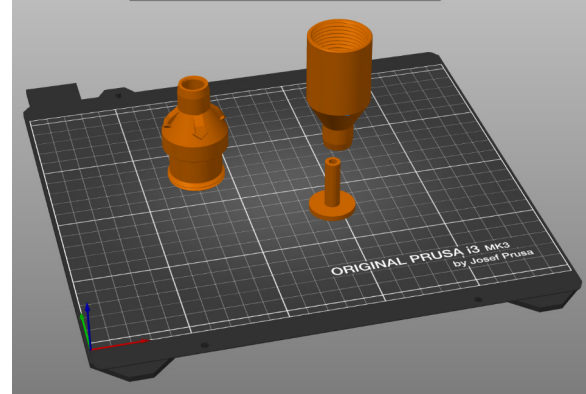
3D parts positioned on the print bed in the slicer program where support was only enforced on the left part.
